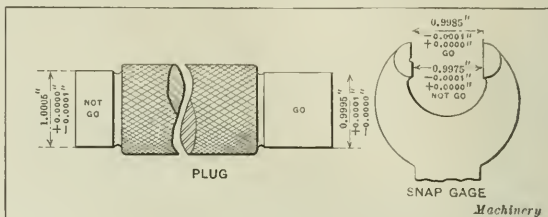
Diagram illustrating Method of setting Manufacturing Tolerances on Working and Inspection Gages
